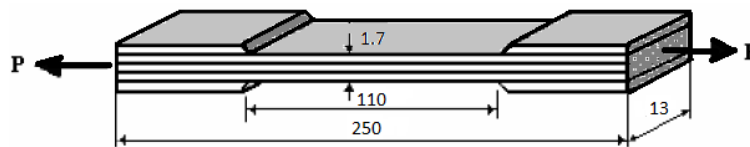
Test specimen geometry and dimensions for longitudinal tensile loading
